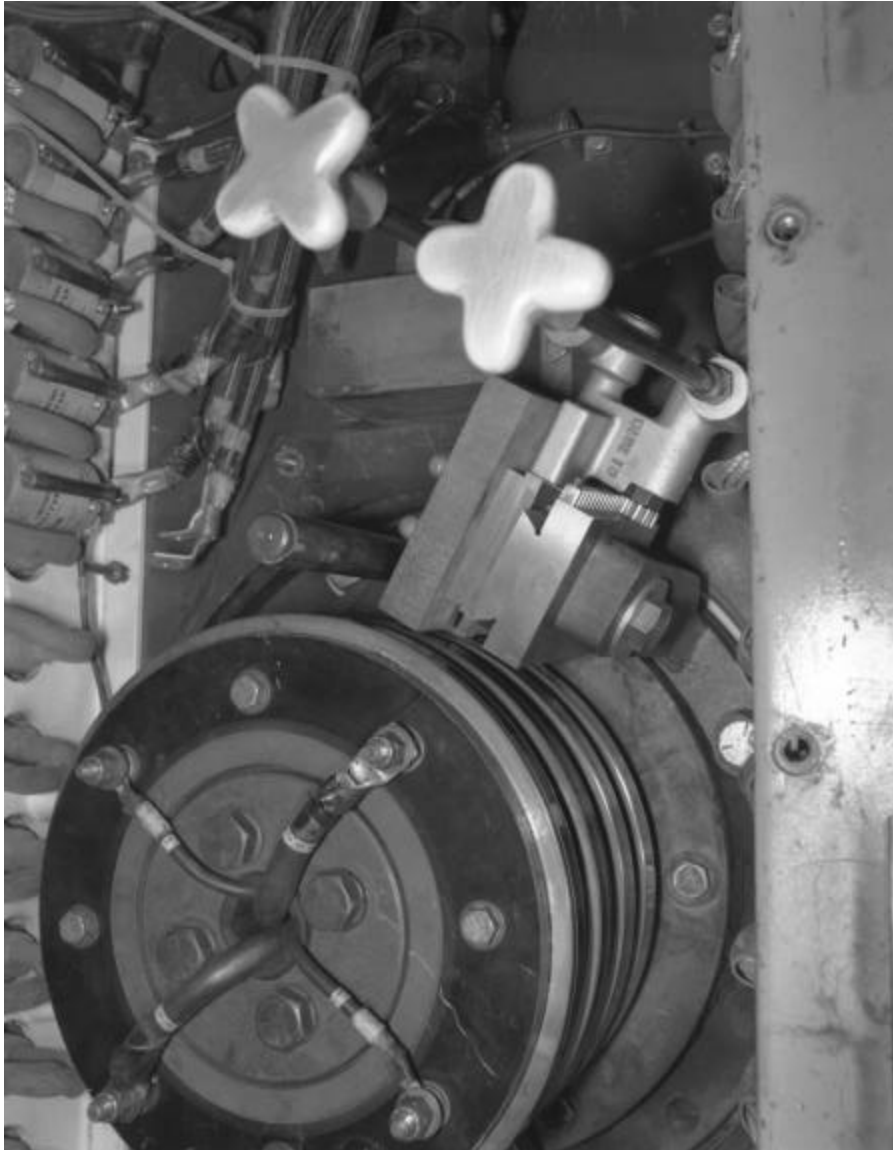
DC Generator Collector Ring Assembly, Cross-Section
